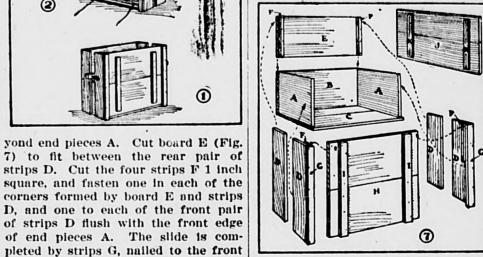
is a longitudinal section through the baler, and Fig. 5 is a cross-section. Figure 7 shows the parts unassembled, with their relative positions indicated. You will find the dimensions upon Figs. 4 and 5.
